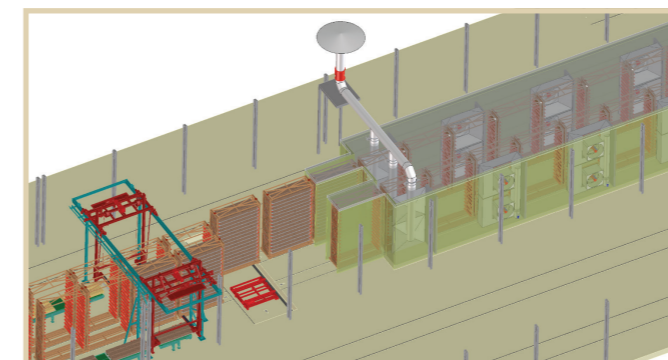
Dryer layout with loading and unloading as well as buffer sections
